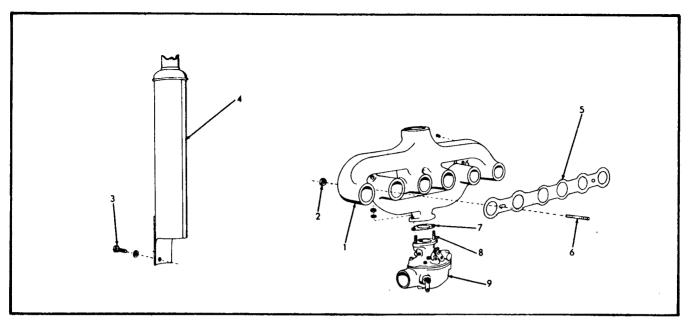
INTAKE AND EXHAUST MANIFOLD - USED ON ENGINE #201220 TO #45-1001-G
